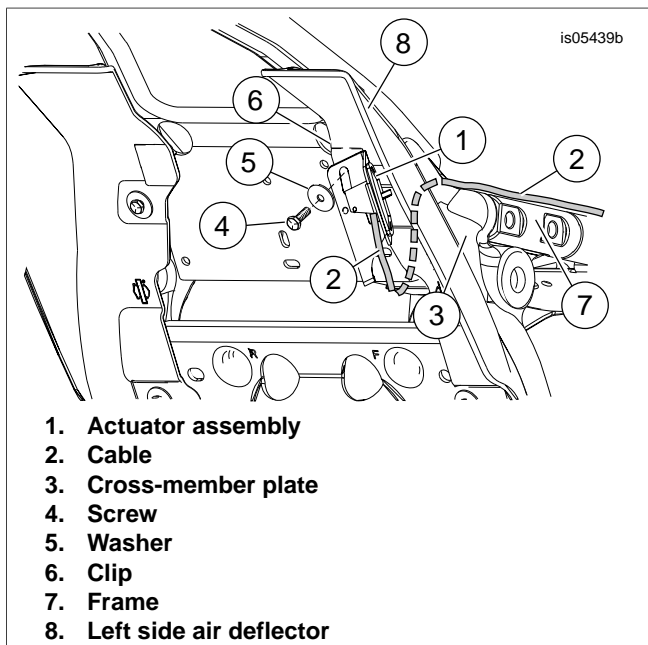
Installing Actuator Assembly with Mid-Frame Air Deflector
